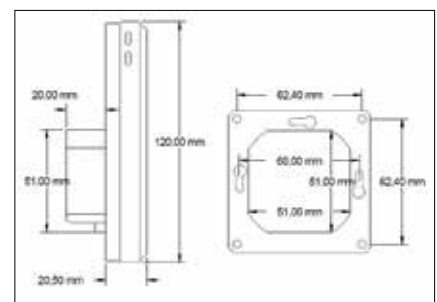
Dimensioned drawing to facilitate installation in wall box or panel front
